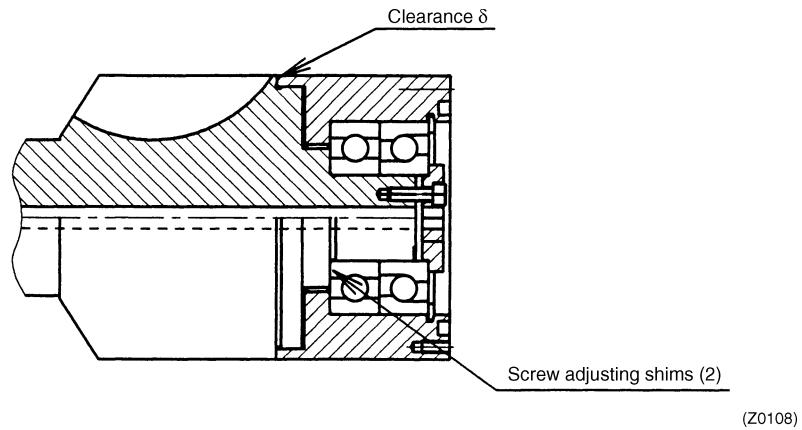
Adjusting clearance between screw rotor and main bearing holder
